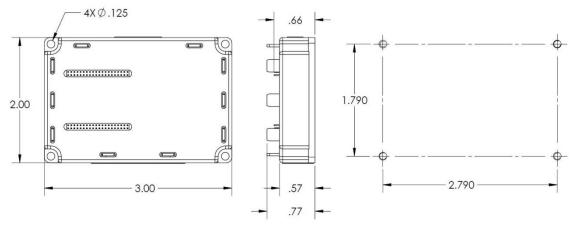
Dual Axis Package Dimensions and Mounting Pattern (in)
